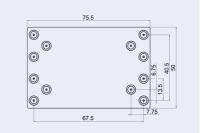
Schematic drawing of double slide format -Fluidic 948 with 12 Luer interfaces
